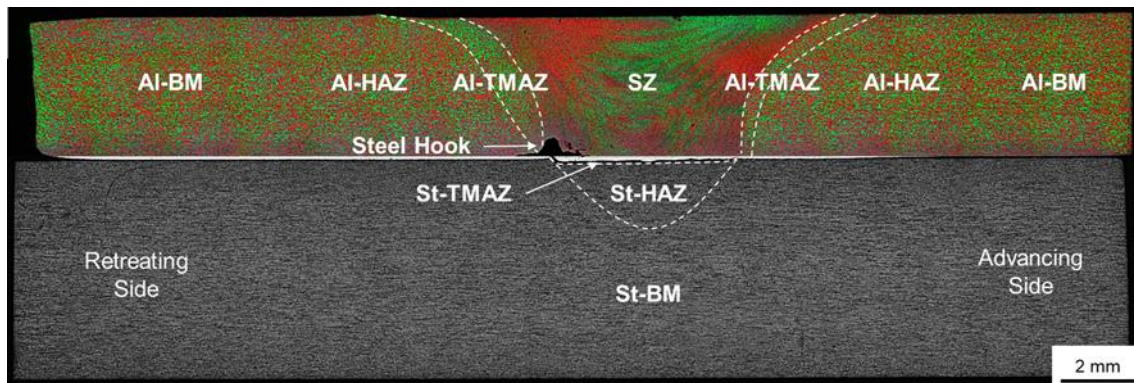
Microstructure of the weld 3, produced using a welding speed of 5 mm/s and rotational speed of 700 rpm, and weld zones.
